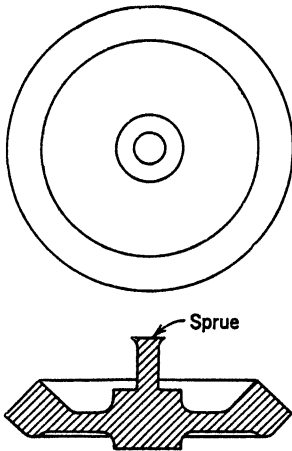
Bevel gear blank produced by semicentrifugal casting process.
